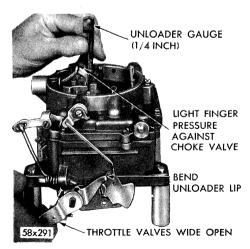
Checking Choke Unloader Adjustment (wide open kick)
